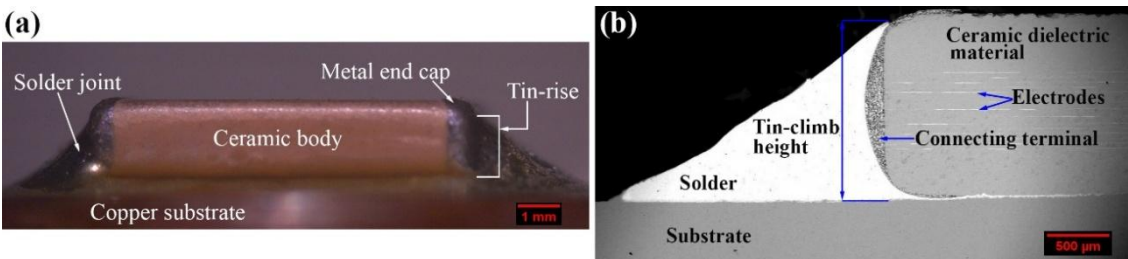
2220-capacitor joint assembly (a) stereomicroscopic image, (b) cross-sectional view of the joint
